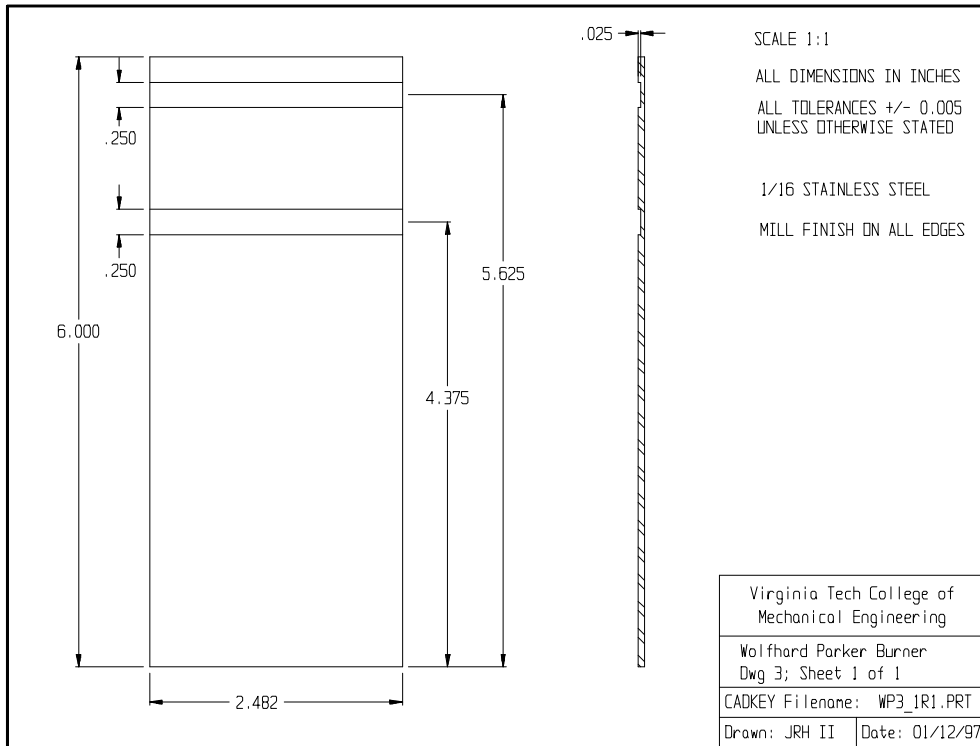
Burner Slot Dividing Walls, Drawing 3 Sheet 1 of 1
